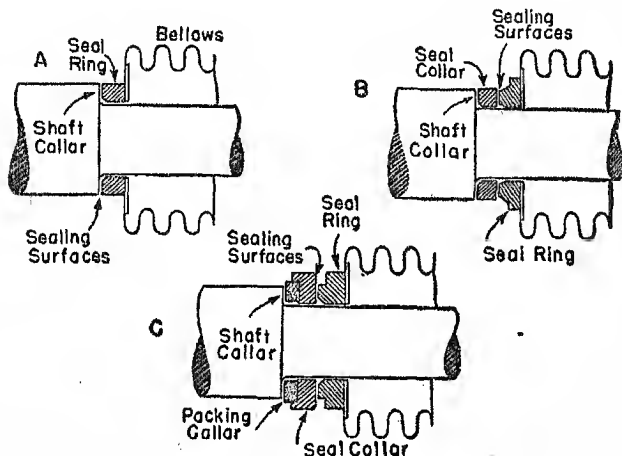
Shaft Seal Constructions, Showing the Surfaces Which May Require Lapping.
